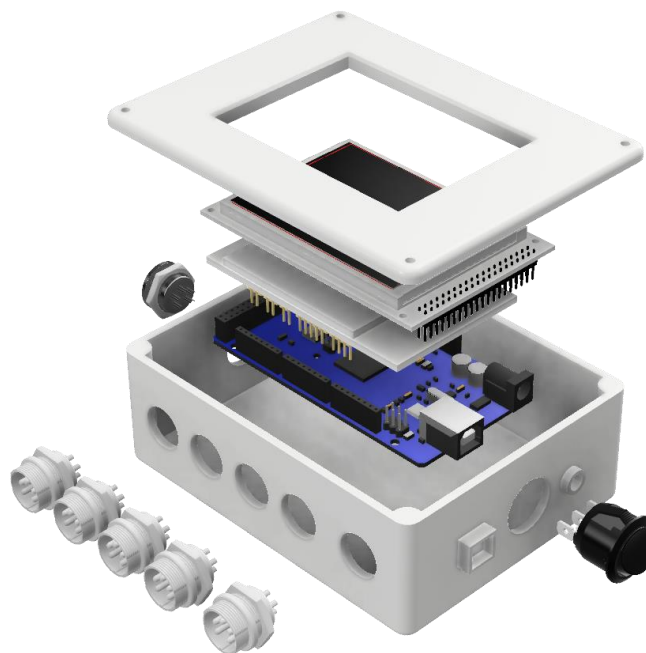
Exploded 3D CAD view of the cuff controller.
